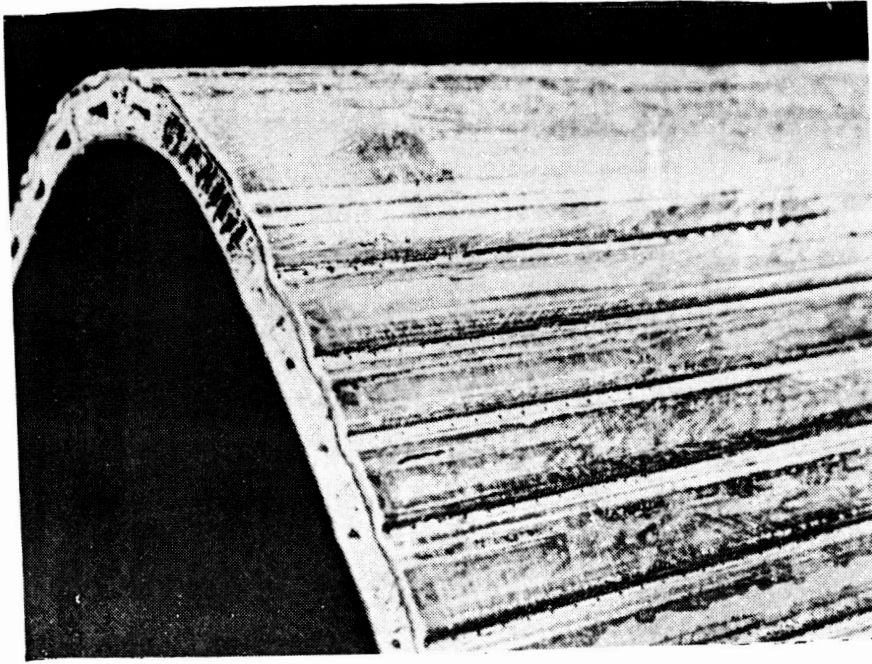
Close-Up View of MD2 Test Article after Metering Holes had been Drilled
